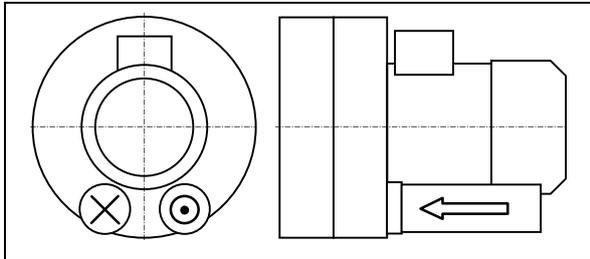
2BH1640 (two-impeller pump-motor unit with double-flow design)
